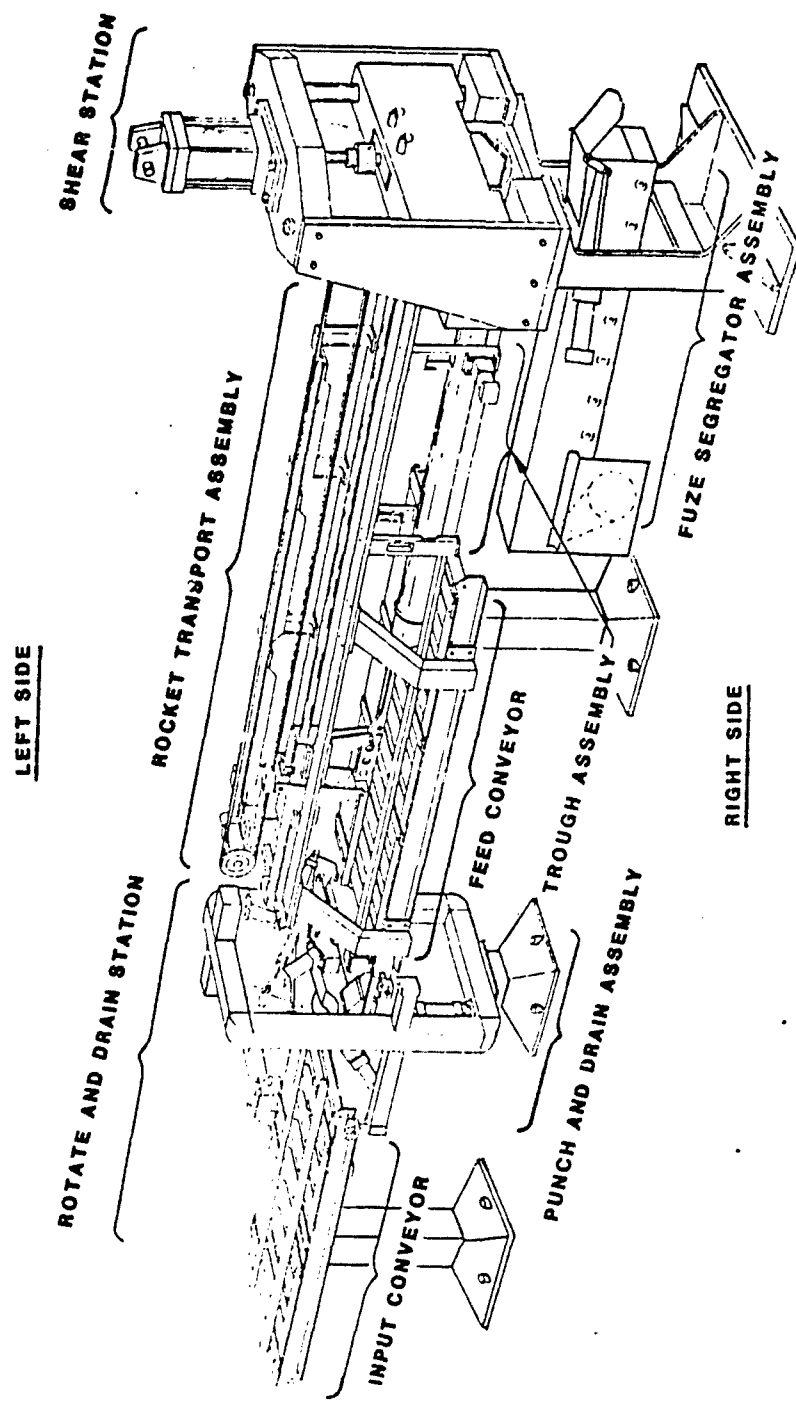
ROCKET SHEAR MACHINE (RSM).
